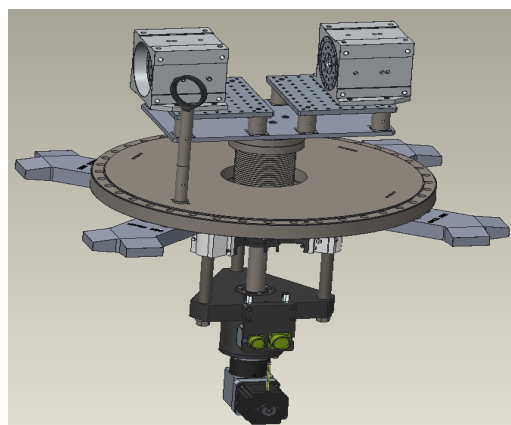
Magnet system with the actuator assembled on the vacuum flange.
